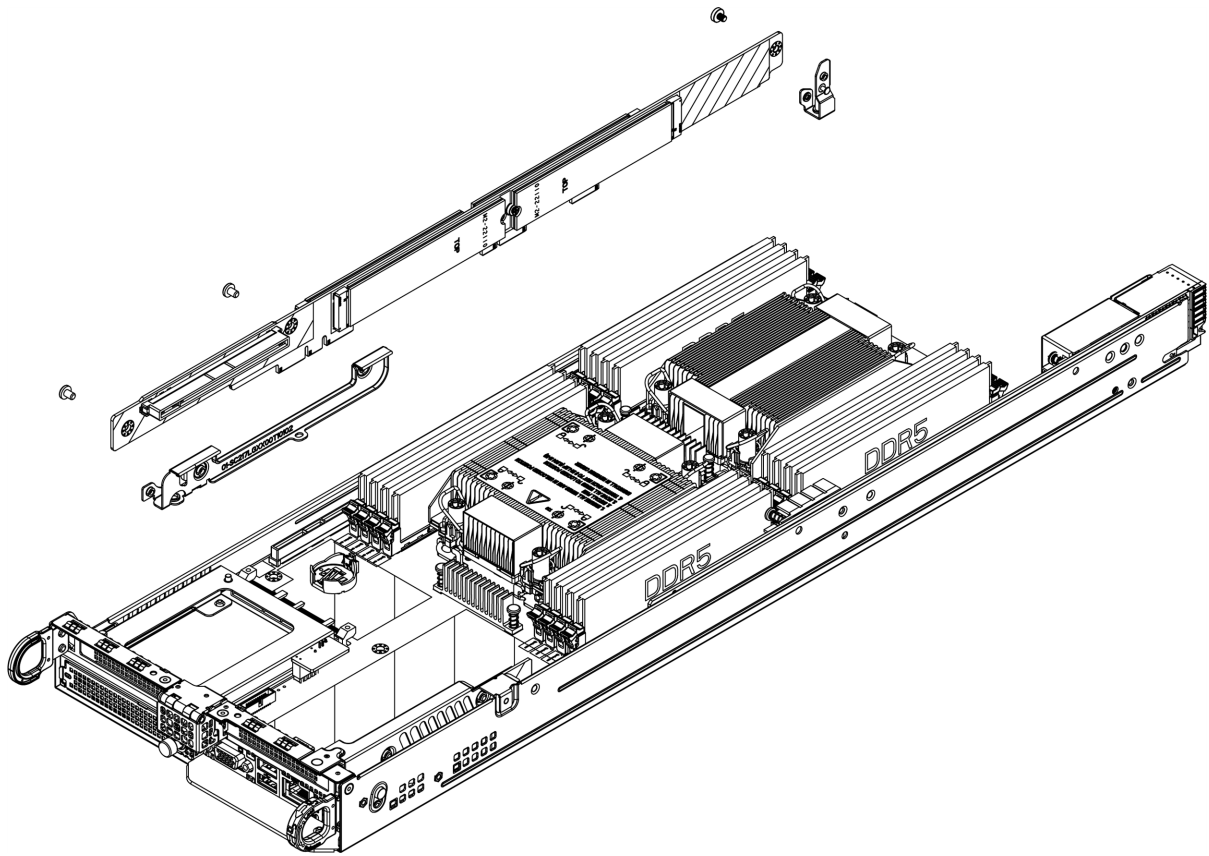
Installing Expansion Card onto M.2 Carrier-and-Riser Card
